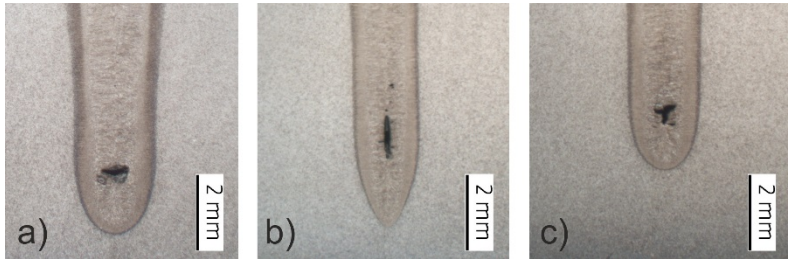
Solidification crack forms in the weld roots (a) horizontal, (b) vertical and c(c) cross form
